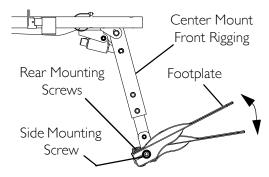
Adjusting the Center Mount Footplate Angle - After 2/14/07
